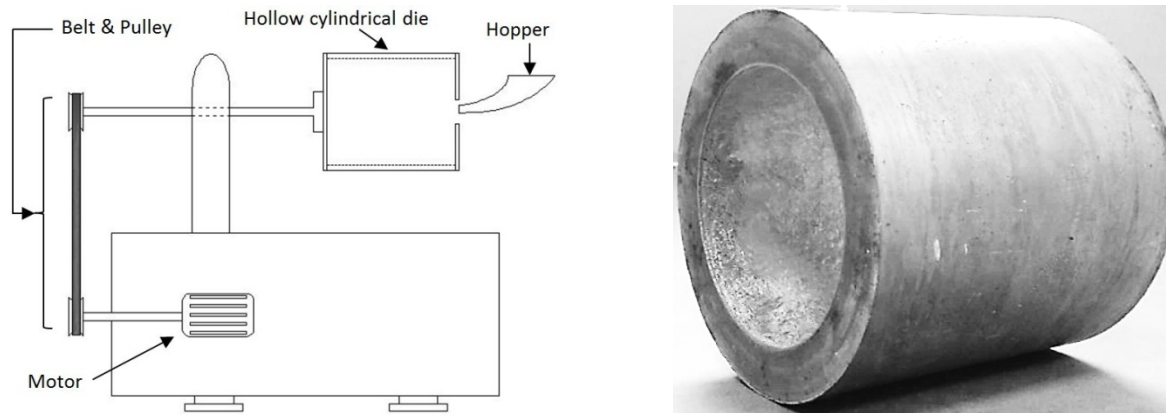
(a) Centrifugal casting machine schematic (b) Centrifugally cast product.
